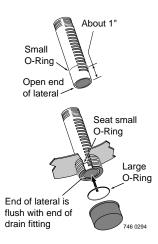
Drain Fitting Assembly. This assembly allows water to drain without losing the sand out of the filter tank.
